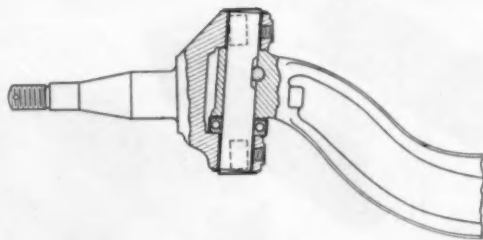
Ackermann axle with steering knuckles banished forever the turning axle with non-swiveling wheels used on the earliest horseless carriages.
